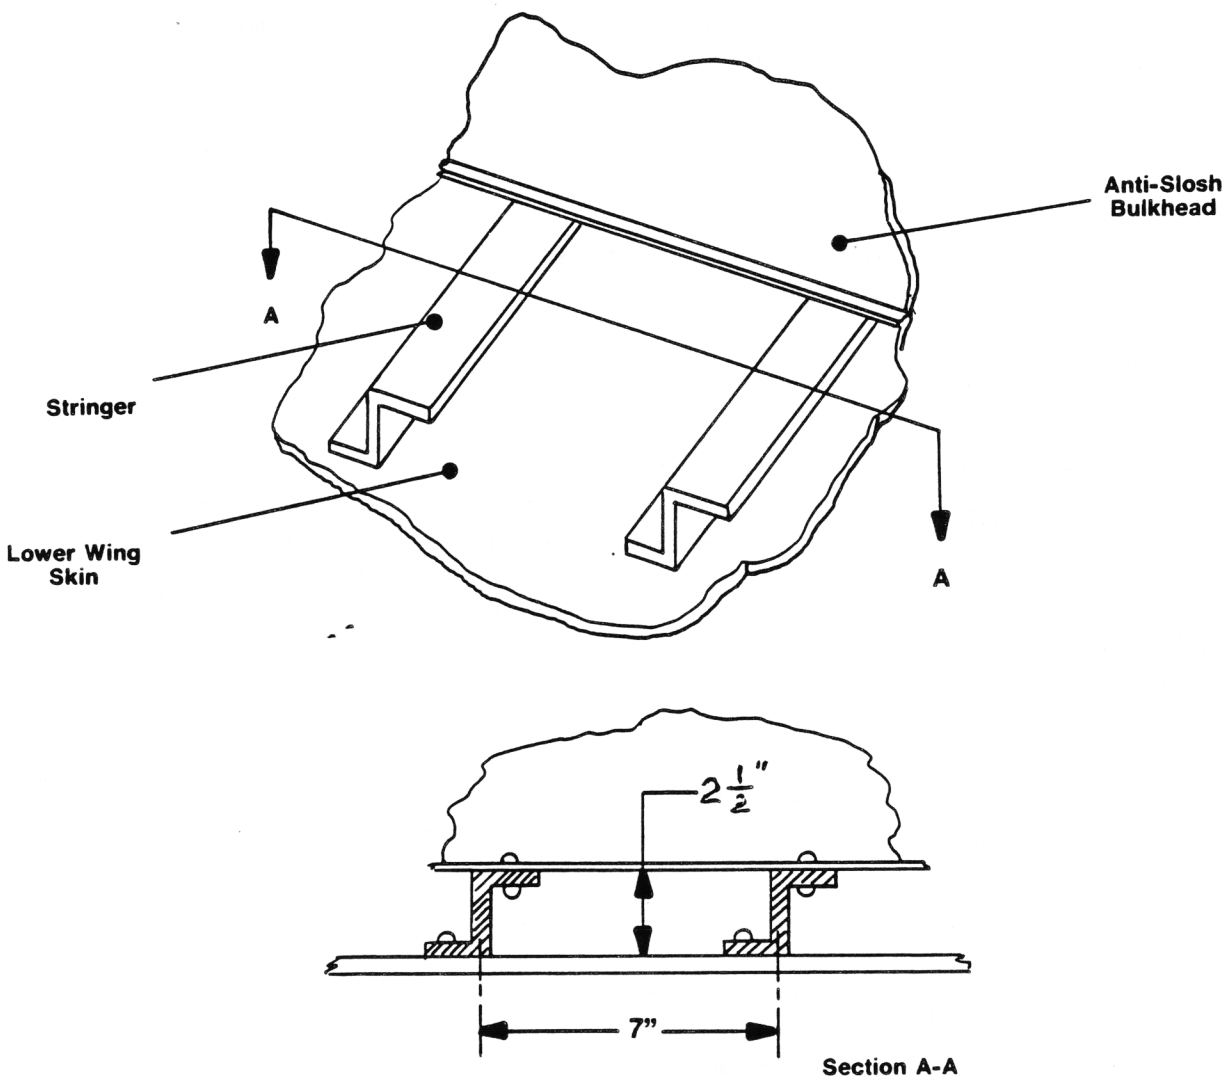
DETAILS OF STRINGER AND BULKHEAD DESIGN
